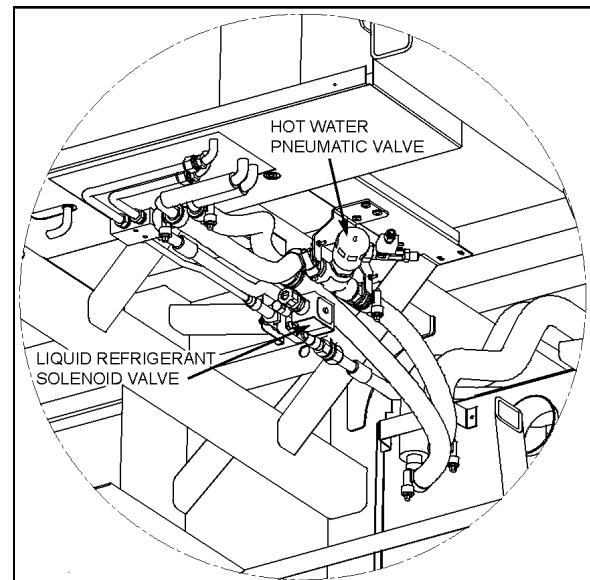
DRIVER'S EVAPORATOR LIQUID SOLENOID VALVE
